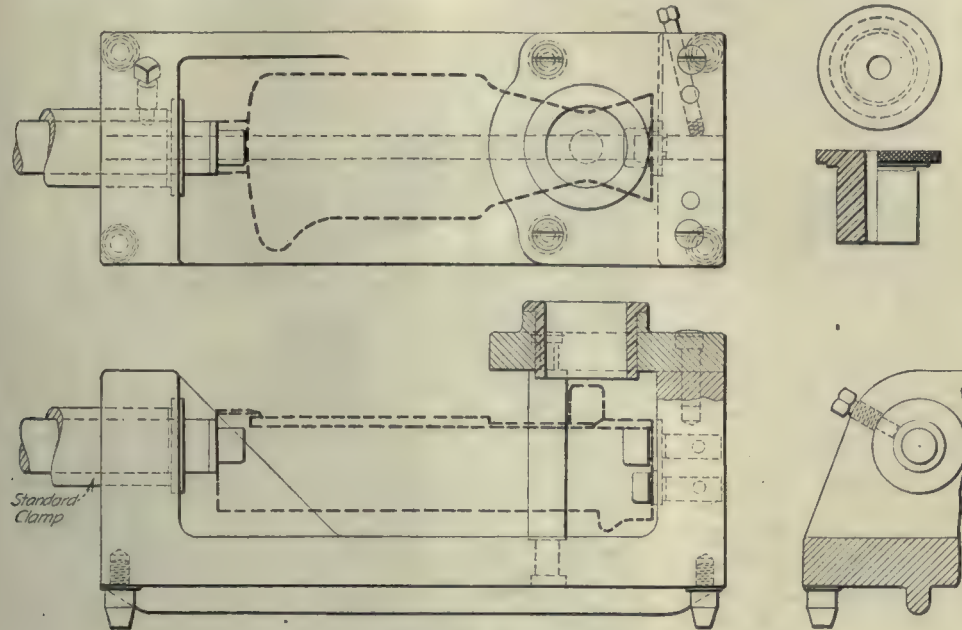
DRILL JIG FOR MAGAZINE BOSS
